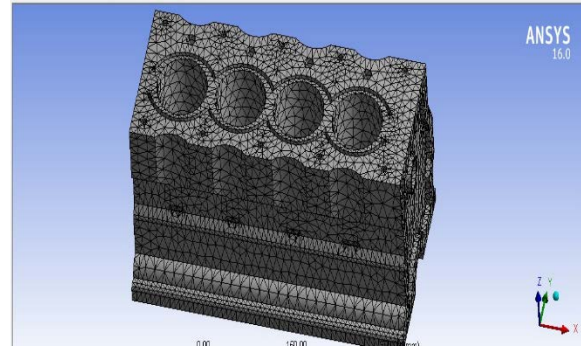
Geometry and Boundary conditions of a cylinder-head block
